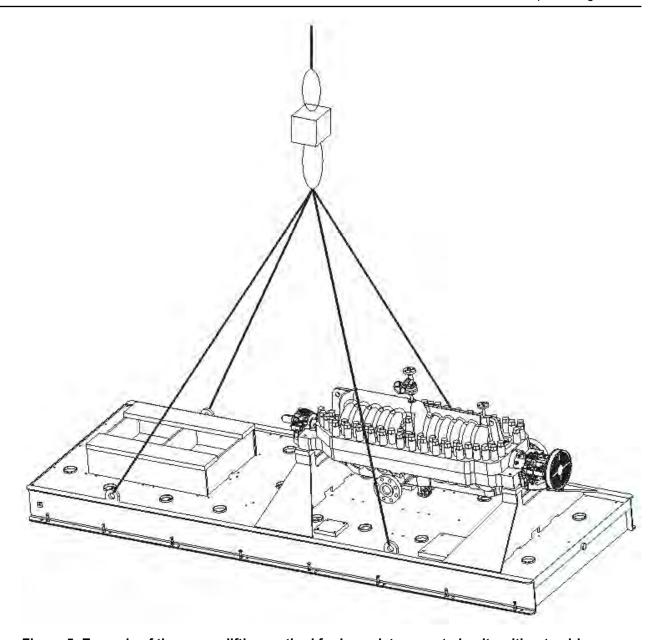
Example of the proper lifting method for baseplate-mounted units without a driver
